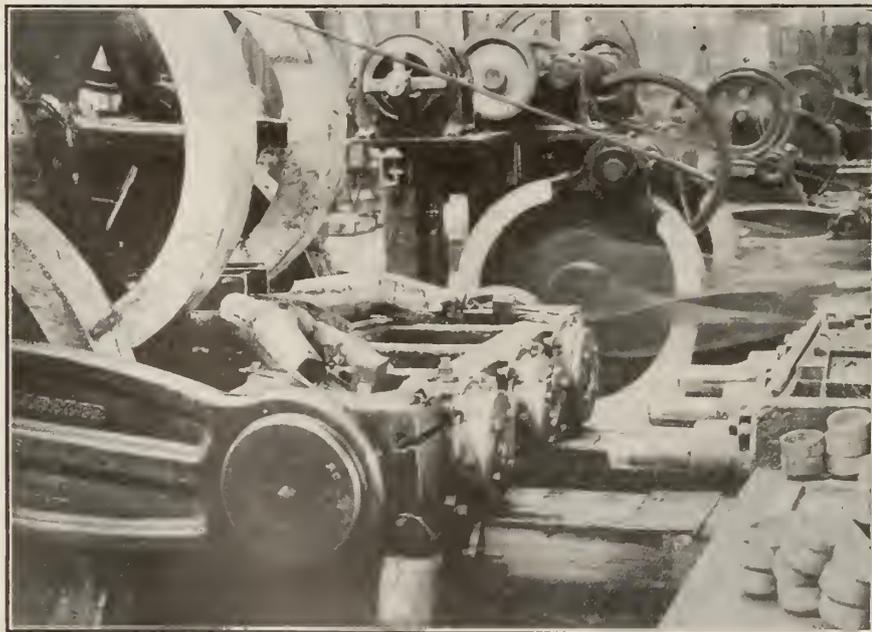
BULLDOZER WITH THREE SETS OF DIES AND THREE PUNCHES FOR CUPPING AND MAKING THE FIRST DRAW ON 18-PDR. SHRAPNEL SHELL CARTRIDGE CASES. NOTE CONVEYER TUBES FOR CARRYING CASES TO REAR OF MACHINE.
